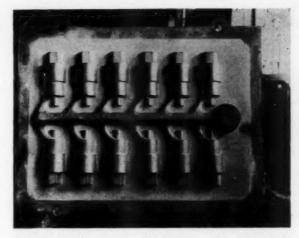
Cope side of aluminum matchplate used in casting bronze boiler plugs. Drag side is identical.
